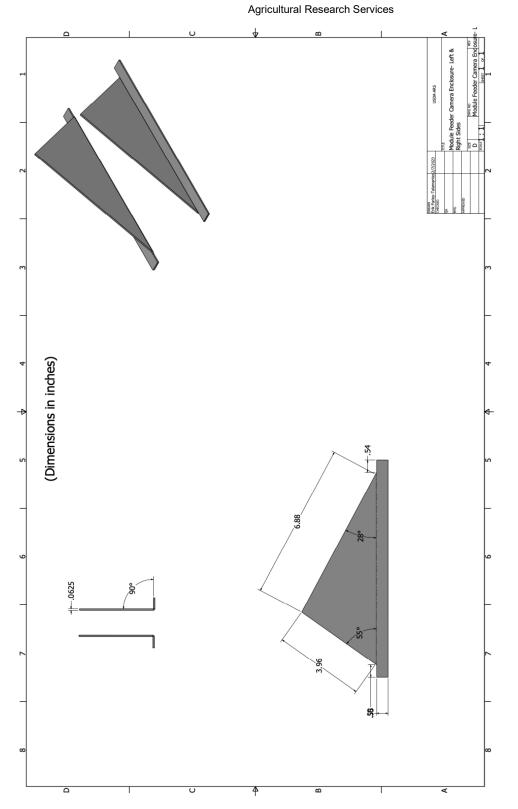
Module feeder camera housing support bracket (#1, 3 of assembly drawing).
